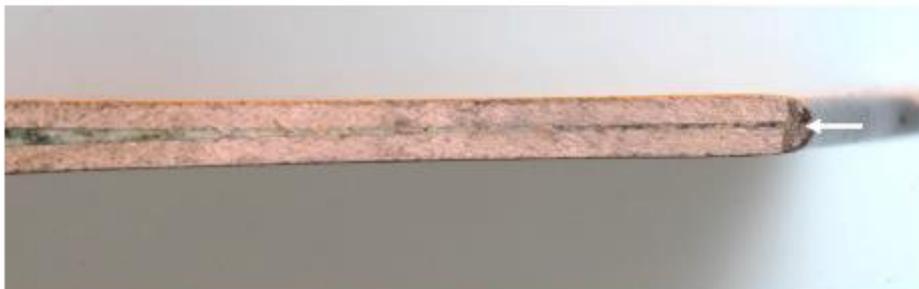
Optical image of fracture surface at origin. Aluminium sheets joined by adhesive (blue) and covered with coating/sealer (dull grey at trailing edge, arrowed). Upper surface at top.
